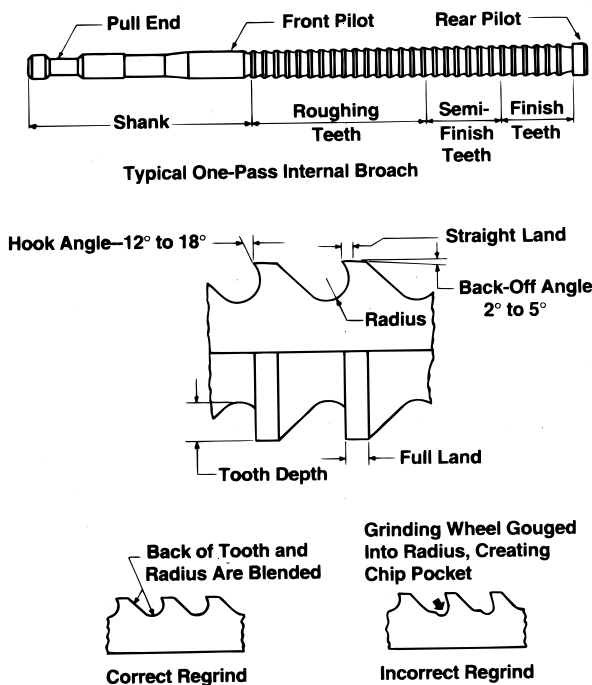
Typical broaching tool used for stainless steels, with suggested geometries and grinding techniques.
